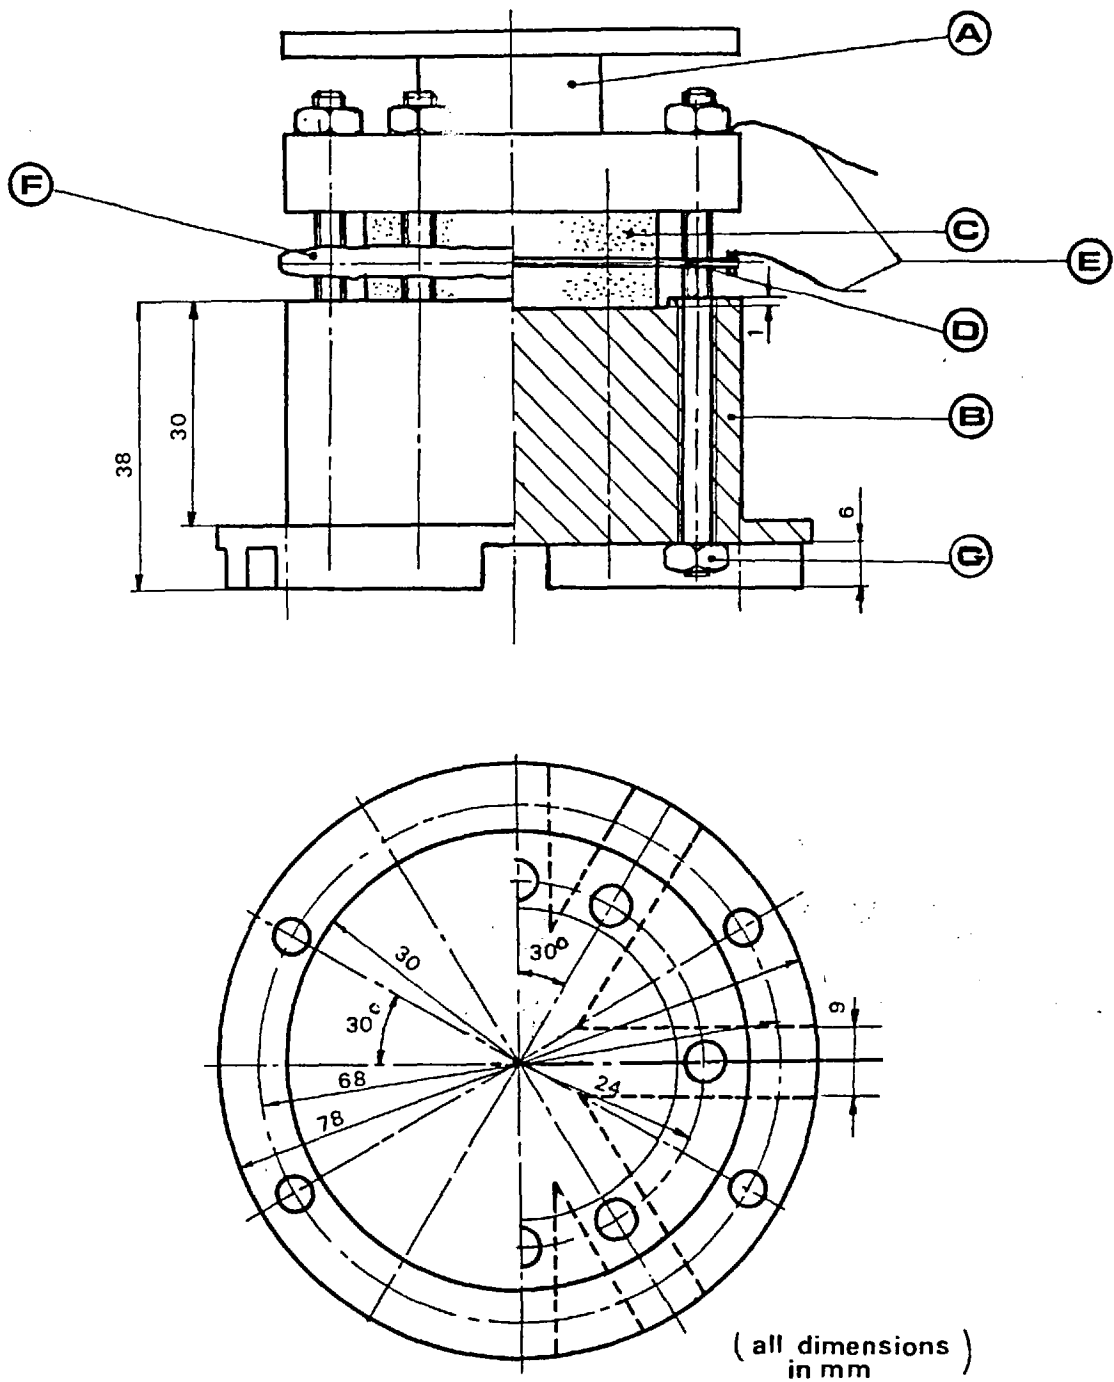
Prototype thrust S.F. bearing - solid base.
